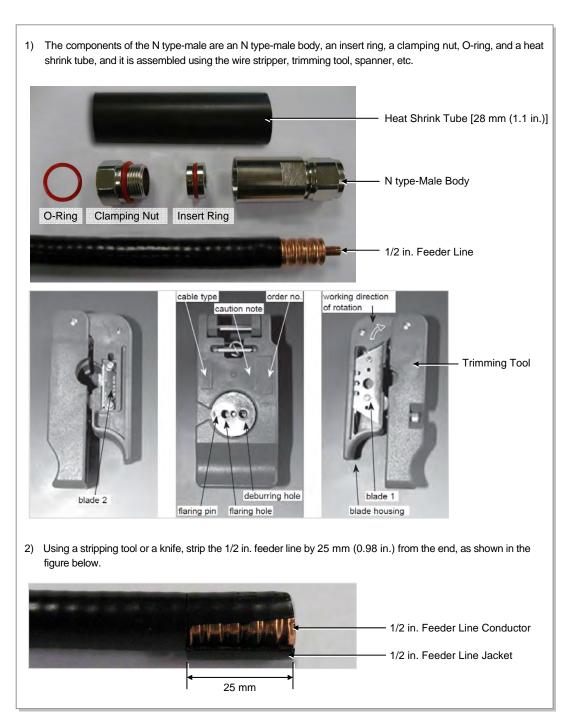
Assembling the N type-male (1/2 in. Feeder Line) Connector (1)
